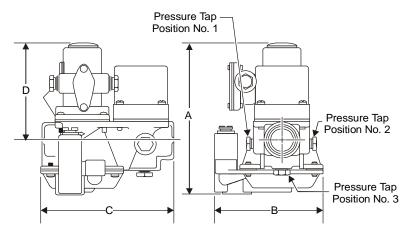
Lever-acting Regulator Model Dimensions Showing Optional Pressure Tap Positions
